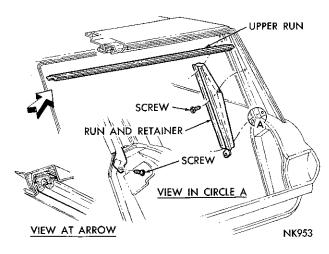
Tail Gate Glass Upper Run and Pillar Run
